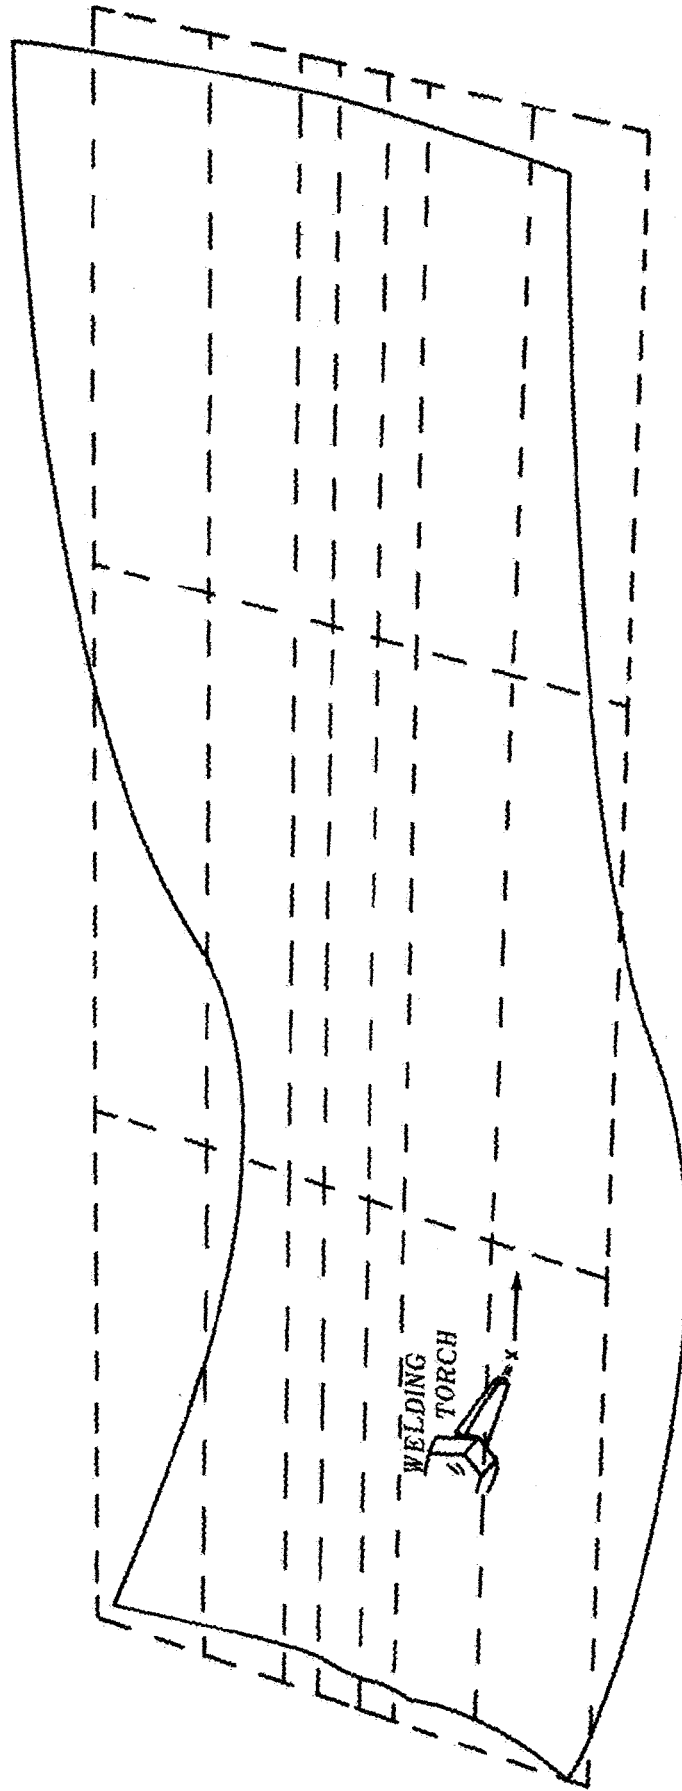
SHAPE OF PANEL DURING WELDING
